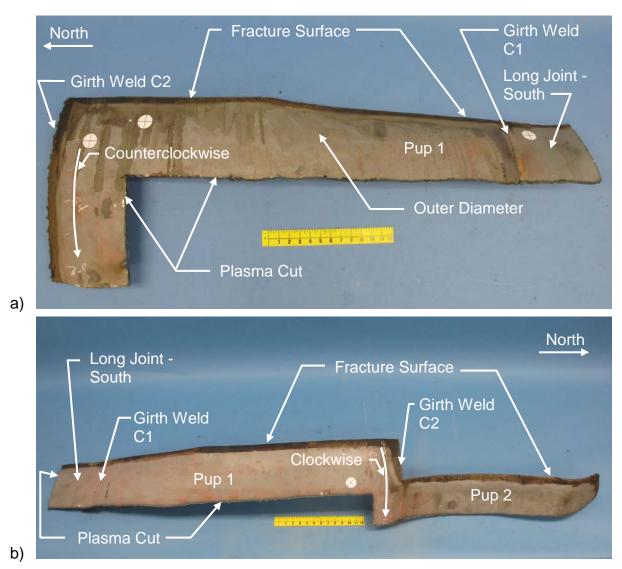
Laboratory photos of the sections cut from the pipe for fractographic examination; a) Pup 1 counterclockwise fracture surface; b) Pup 1 and pup 2 clockwise fracture surface;
